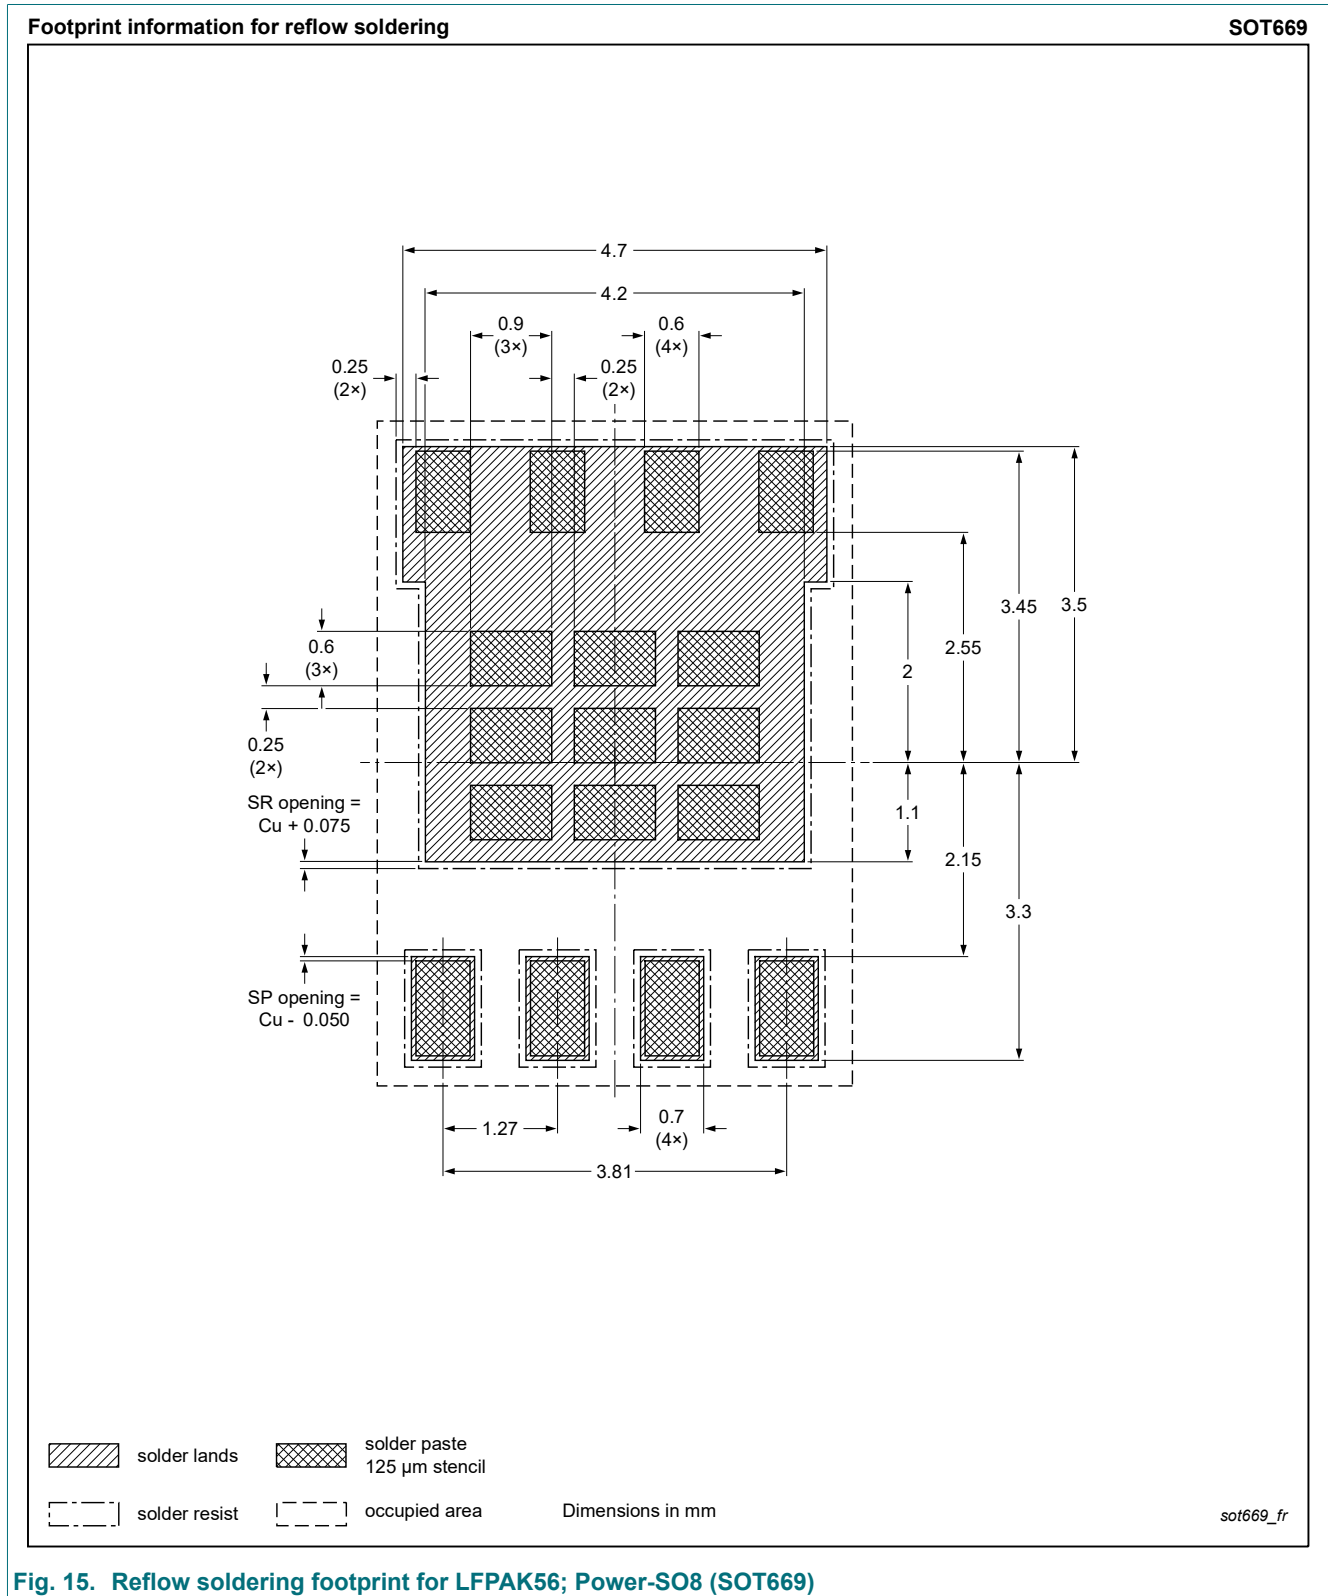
Reflow soldering footprint for LFPAK56; Power-SO8 (SOT669)
